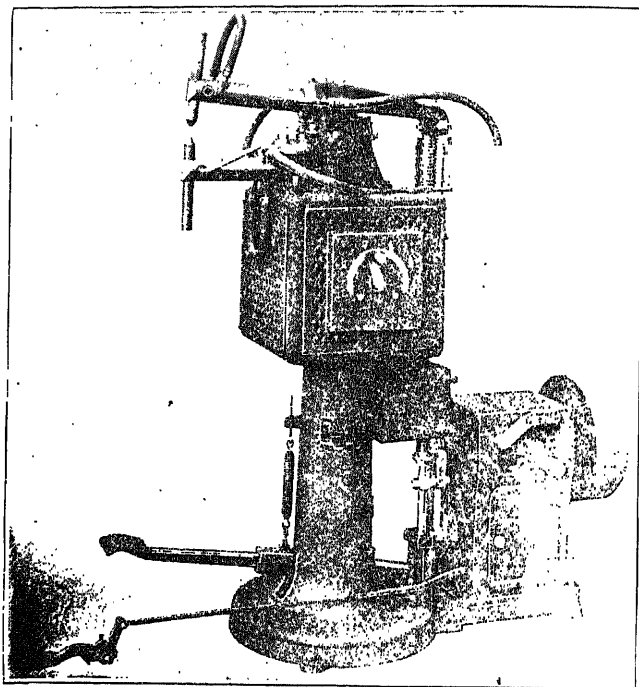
Taylor Cross-Current Spot-Welding Machine.
